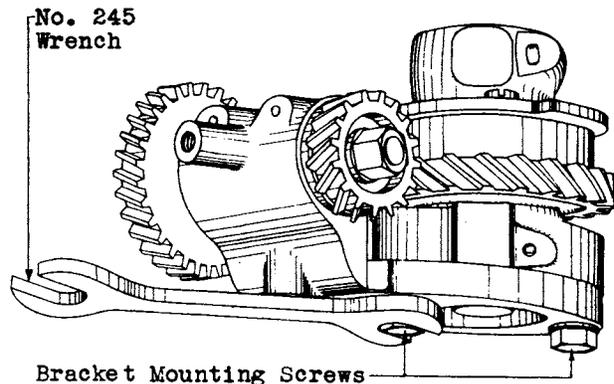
Adjustment of Counter-Shaft Bracket to Obtain Minimum Back-lash Between Gears on 166 Type Interrupters
